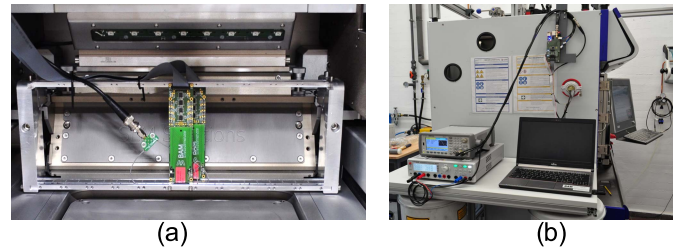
(a) MR probes on fixture mounted to recoater inside build chamber of LPBF machine. (b) DAQ module and FPGA board with power supply and frequency generator outside of LPBF machine.
